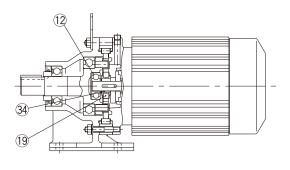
Type CNHM (Horizontal, Gearmotor), 1 Stage Reduction (Example: Frame size 6095)
